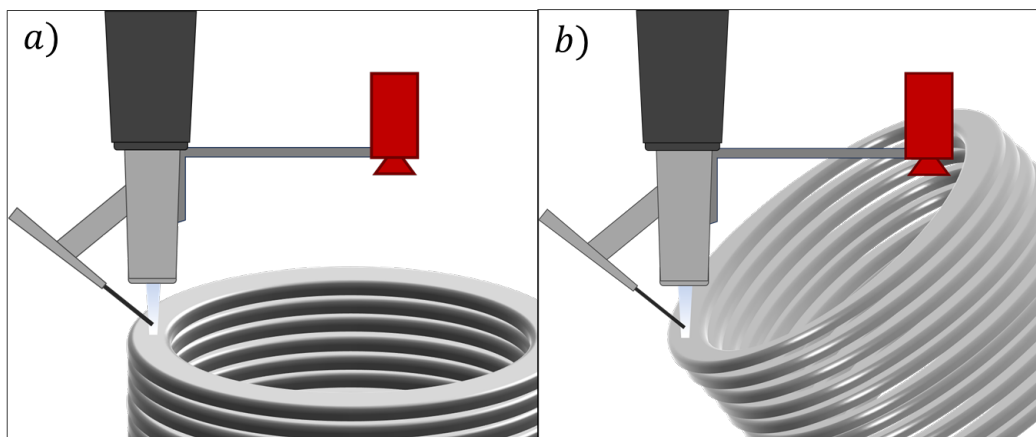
a) Representation of a part manufactured using only X, Y, Z, and A axis: each layer in this way is parallel to the welding plate. b) Representation of a part manufactured utilizing also the B axis. Each layer could be oriented in different directions and therefore there is a danger of collision.
